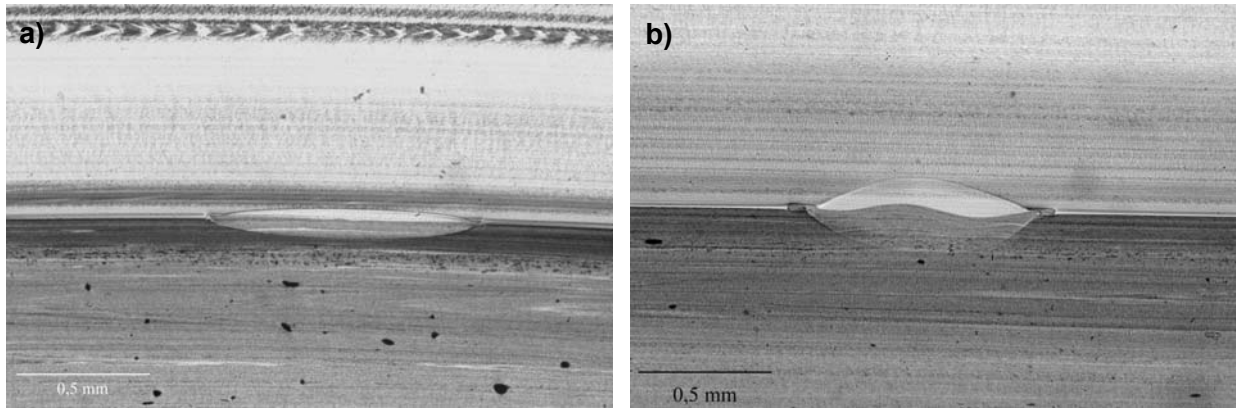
Cross-sections of quasi-simultaneously welded polypropylene samples a) welding speed 150 mm/s, laser power 16 W, 1 scan, welding time 1 s., b) welding speed 7500 mm/s, laser power 45 W, 50 scans, welding time 1 s.
